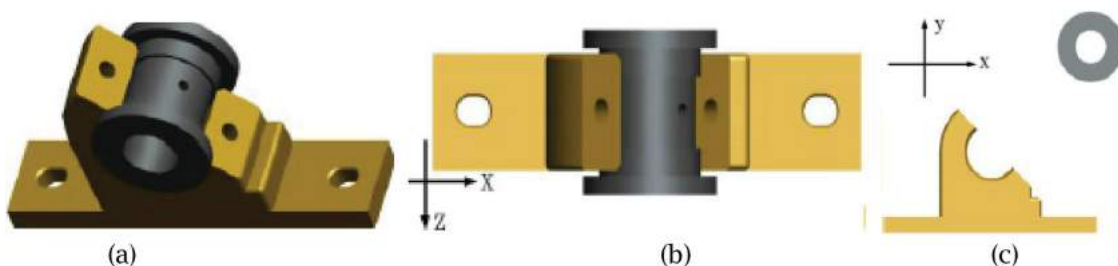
The structure of a split sliding bearing. (a) Axonometric drawing, (b) Front view, (c) The result of disassembling.
